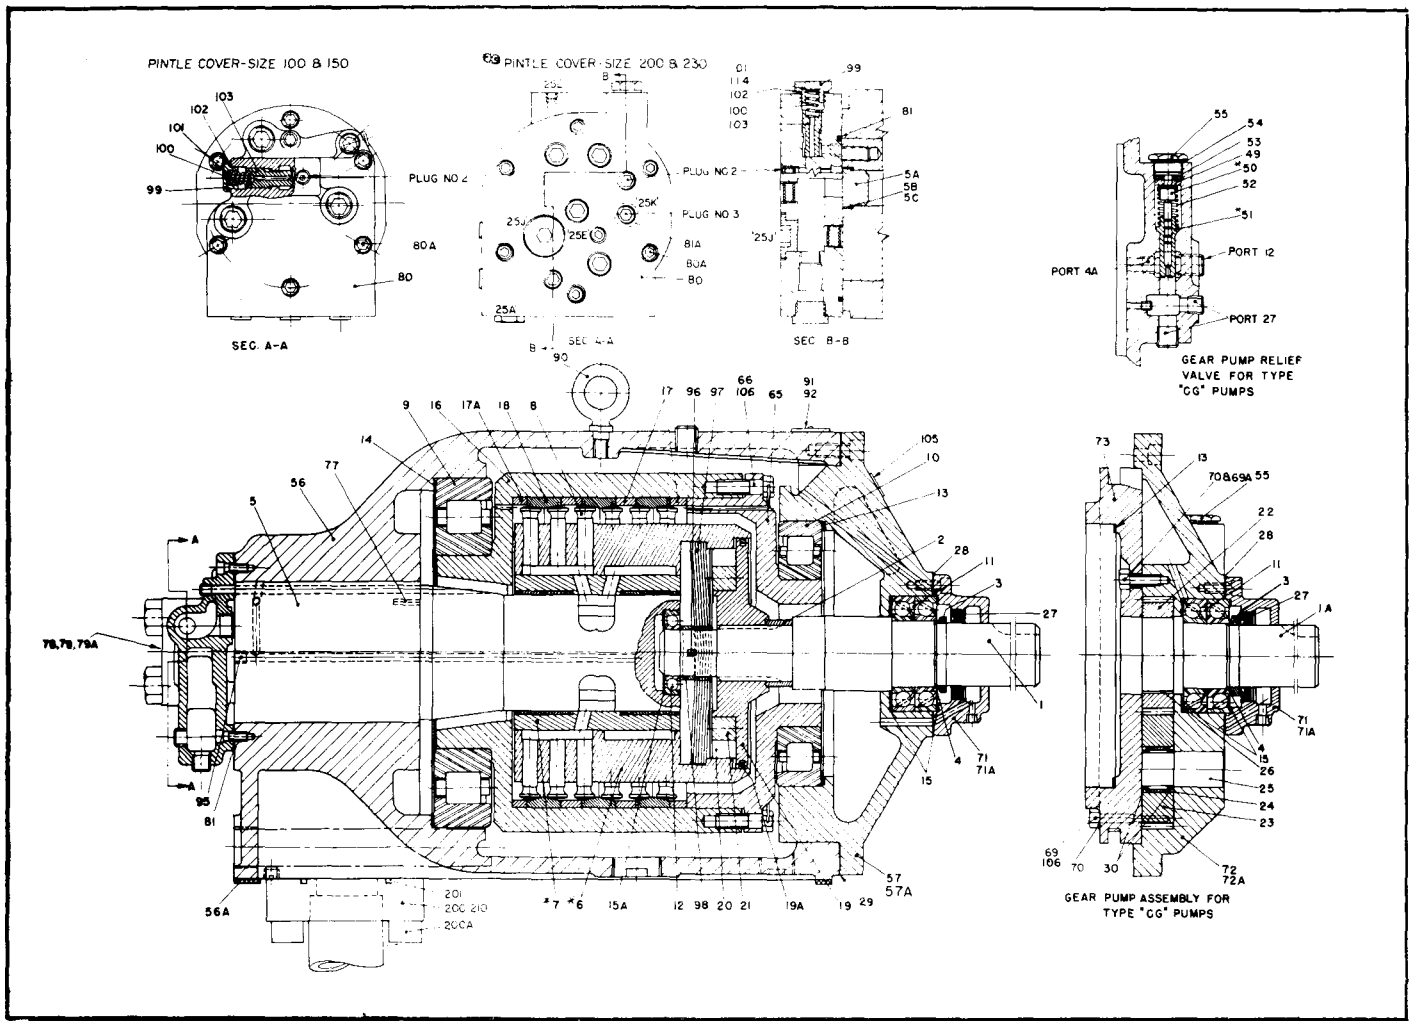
Parts drawing, Oilgear Type "C" and "CG". Size 100 and Larger Pumps and Relief Valves. DS-946205E (500709E).
